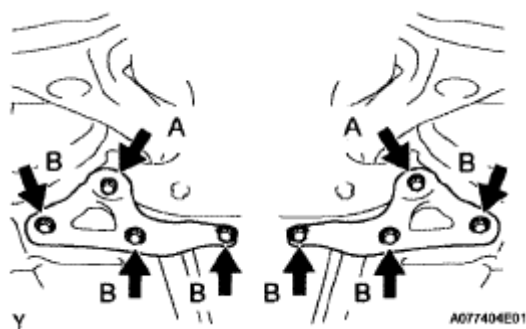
Locating Front Suspension Member Brace Rear RH And LH With Bolts
